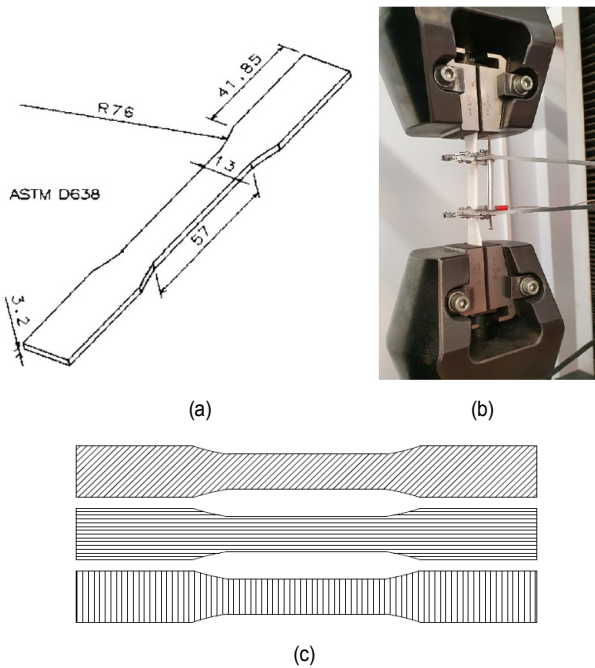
Tensile test specimen schematic: (a) dimensions according to ASTM D638 with units in mm; (b) the experimental setup; (c) raster angles.
